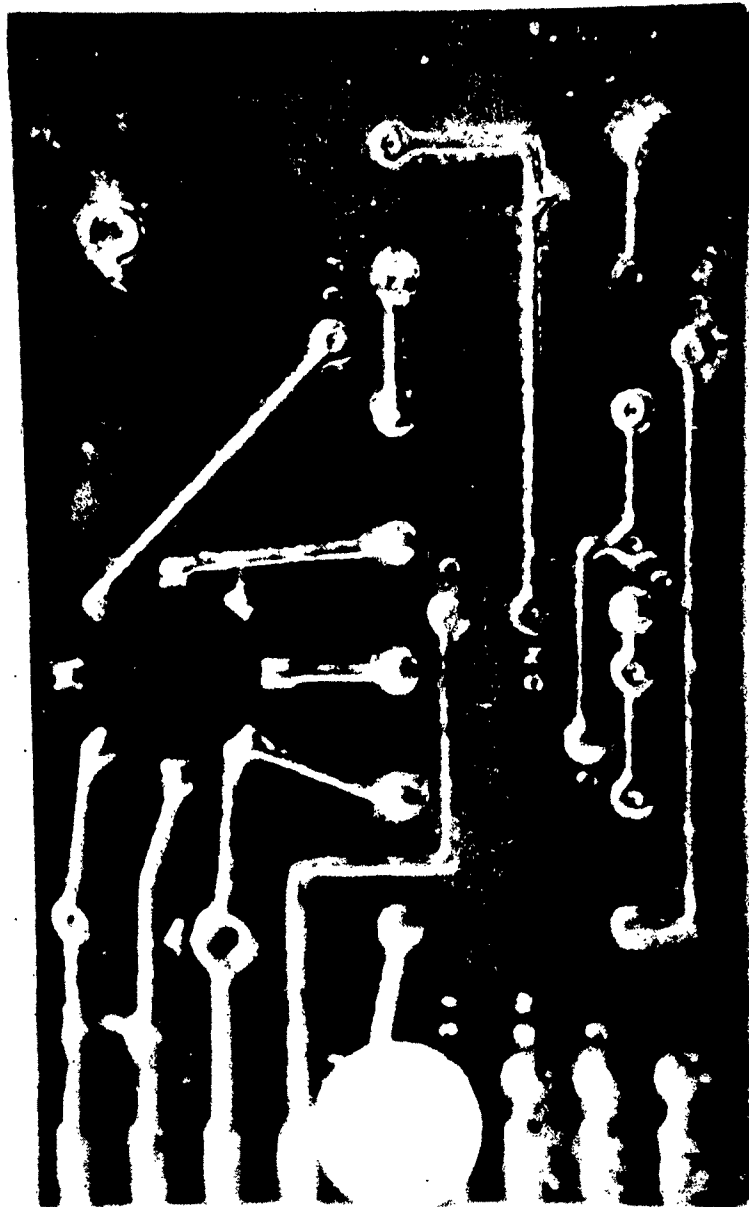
Board No. 24 from Blister Test No. 4 After Soldering.
